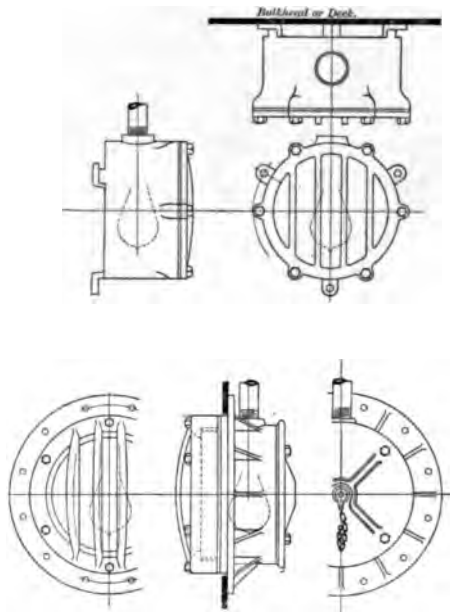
Overhead bunker fixture (top) and bunker fixture.
